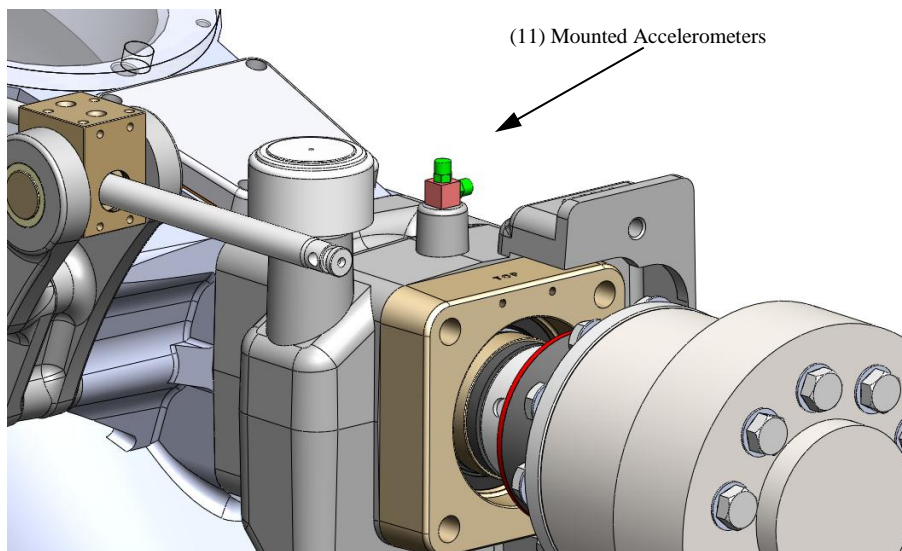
Location of the Accelerometers on the Thrust Bearing Housing
